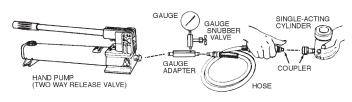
Assembling single-acting hydraulic cylinders to pumps
